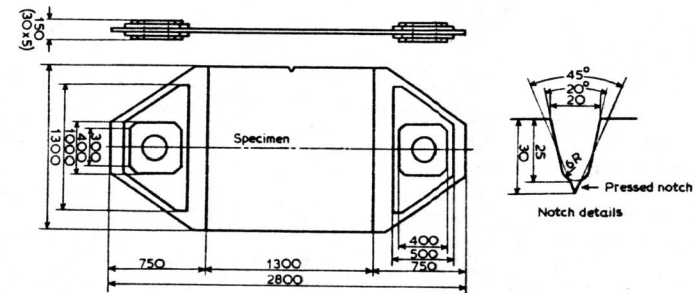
Crack arrester test specimen, pull plate and details of notch.
